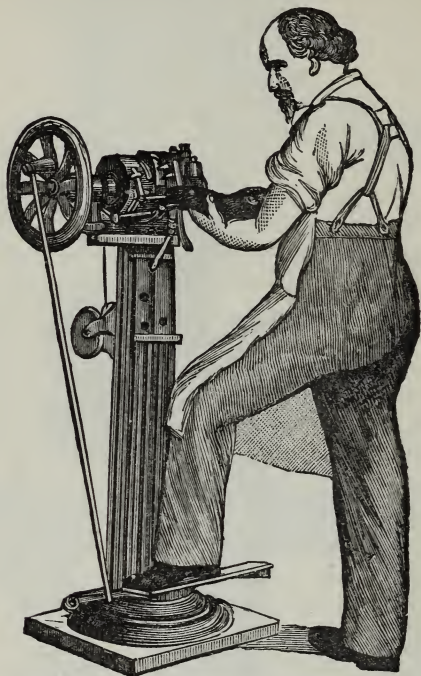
WELT OR FOREPART STITCHING MACHINE.
